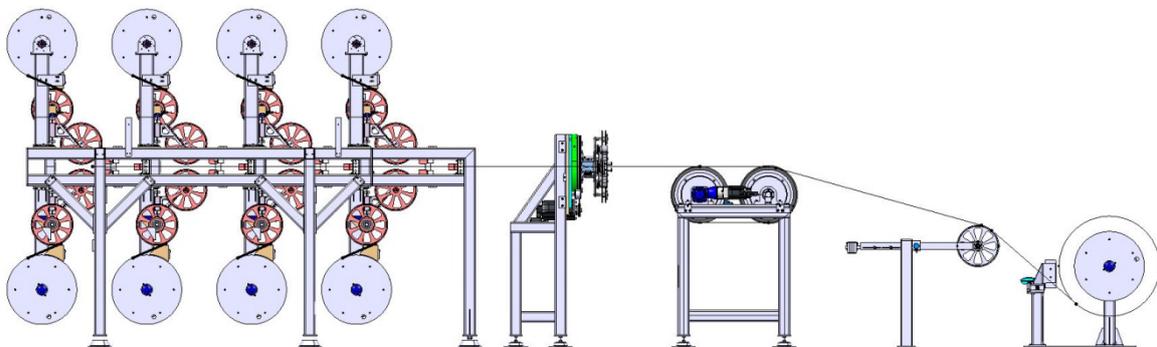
Static machine for the assembly of insulated stacks of tape conductors.
